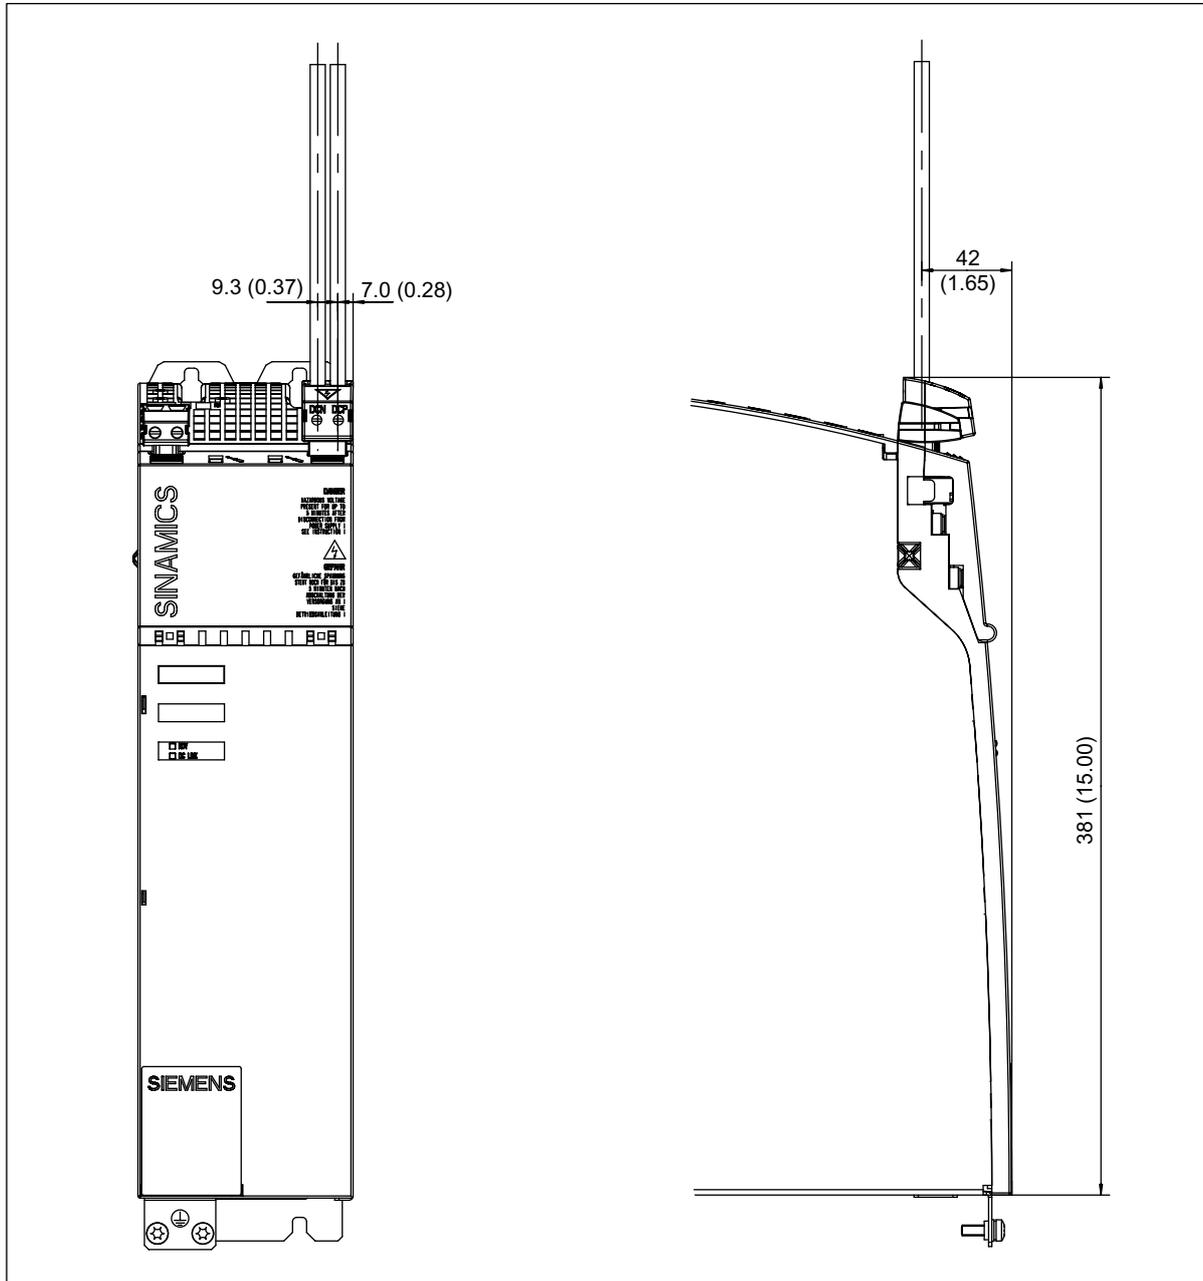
Dimension drawing of 100 mm component with DC link rectifier adapter for 0.5 mm² to 10 mm², all dimensions in mm and (inch)
